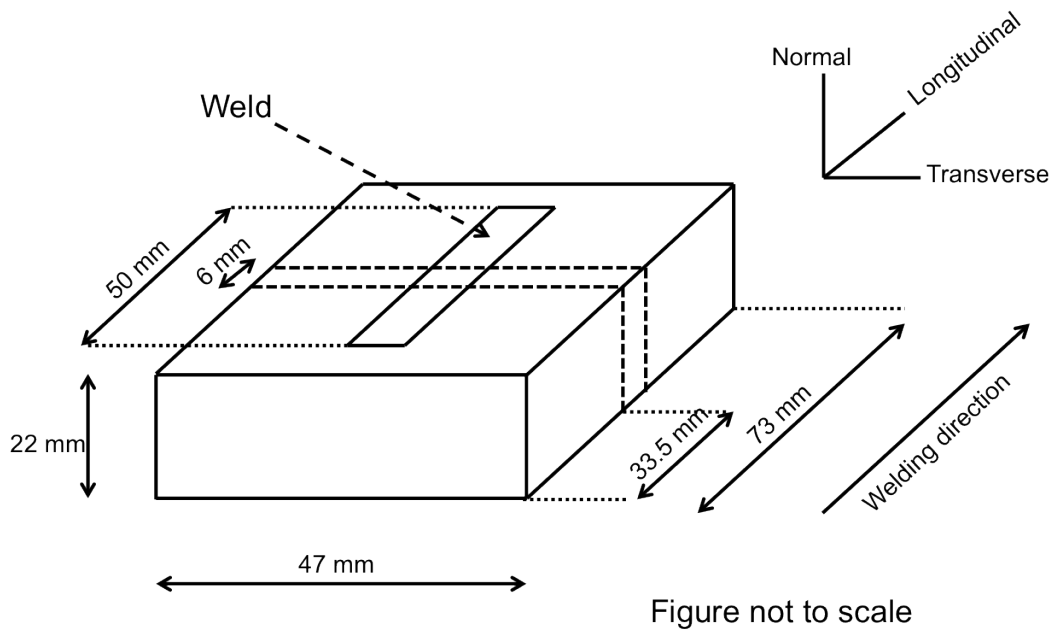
Dimensions of the material used in these trials. Figure illustrates relative position of weld bead, dimension of weld bead, and location of 6 mm stress-free reference samples. Note that figure not to scale.
